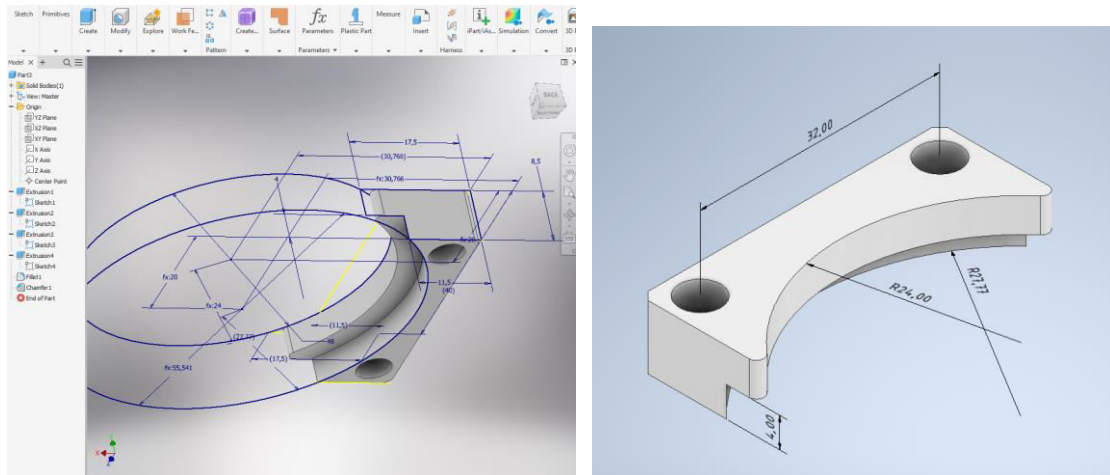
Constructive clamp body of the valve left picture and CAD construction, right important dimensional surface
